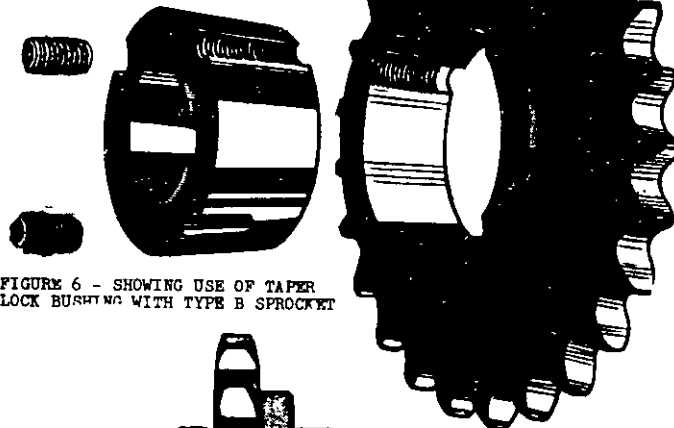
SHOWING USE OF TAPER LOCK BUSHING WITH TYPE B SPROCKET
